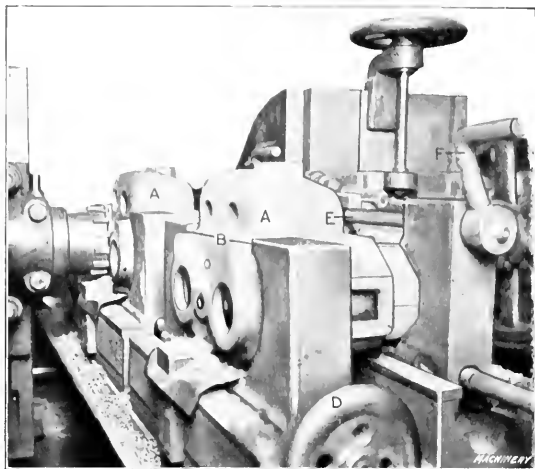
Milling the Top and Bottom Surfaces of the Cylinder Casting
